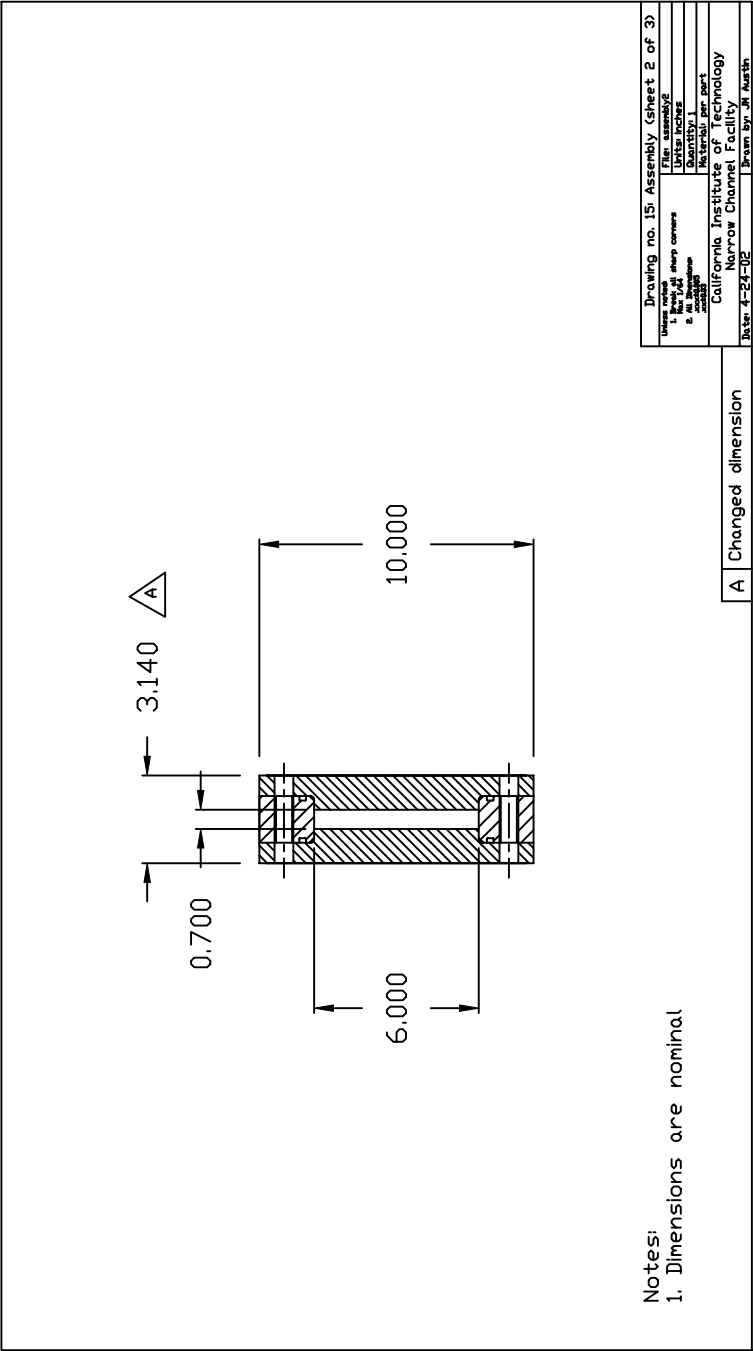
Assembly (sheet 2 of 3), Dwg No. 15
